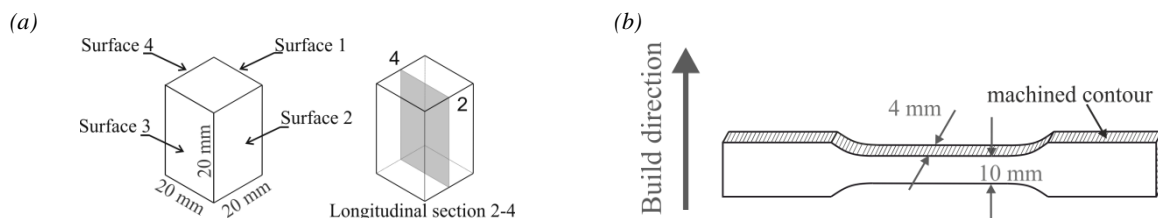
(a) Test specimens (cubes) used for investigating surface roughness (surface 1 to 4) and porosity (in the longitudinal section 2-4); (b) Flat bar tension specimen used for measuring mechanical properties in x/y-plane. The specimen with an as built surface were machined according to E DIN 50125:2016-04 (gauge length of 35 mm).
